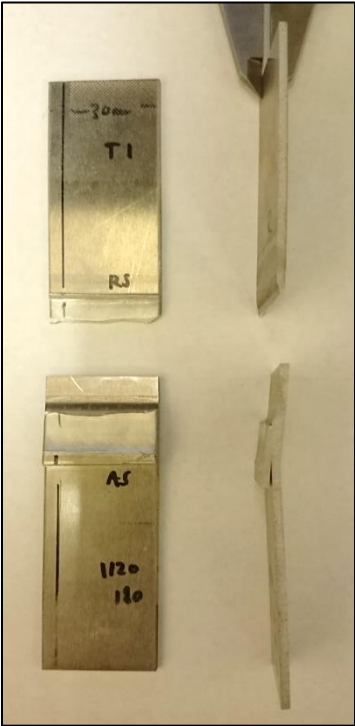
Typical fracture location for samples of similar AA7075 lap FSW. Shown in the figure are pulled samples of a weld made with Tool1 at 180mm/min
